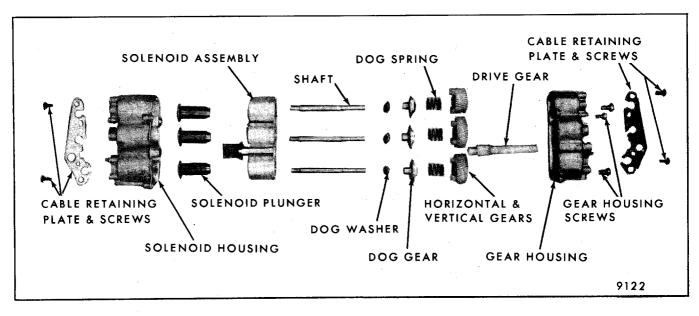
Six-Way Seat Adjuster Transmission Component Parts - Full Width Bench Seat
